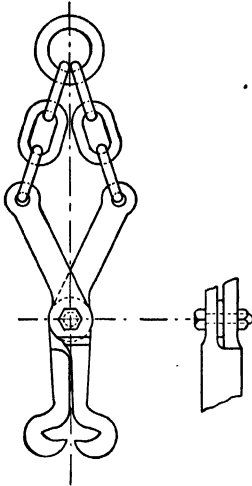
I-beam hook for I-beams 15 in. deep and over.
